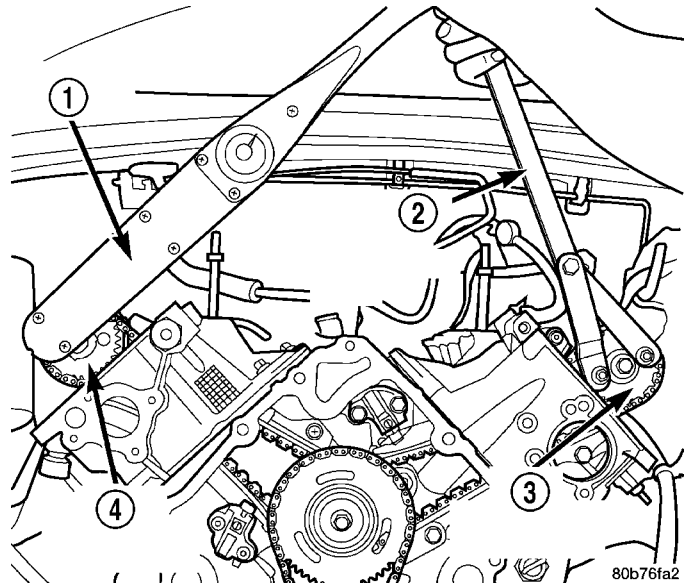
Tightening Right Side Camshaft Sprocket Bolt
